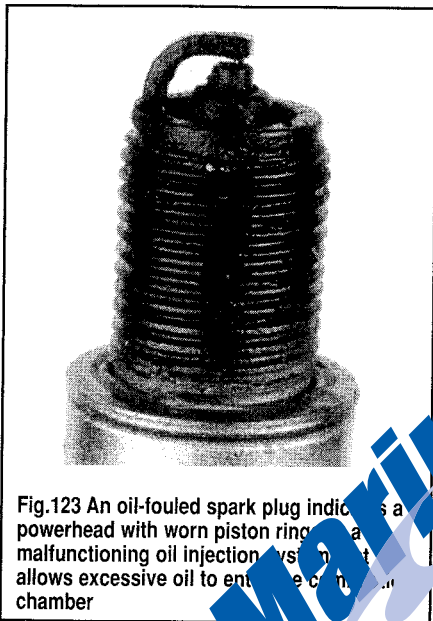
An oil-fouled spark plug indicates a powerhead with worn piston rings or a malfunctioning oil injection system that allows excessive oil to enter the combustion chamber
